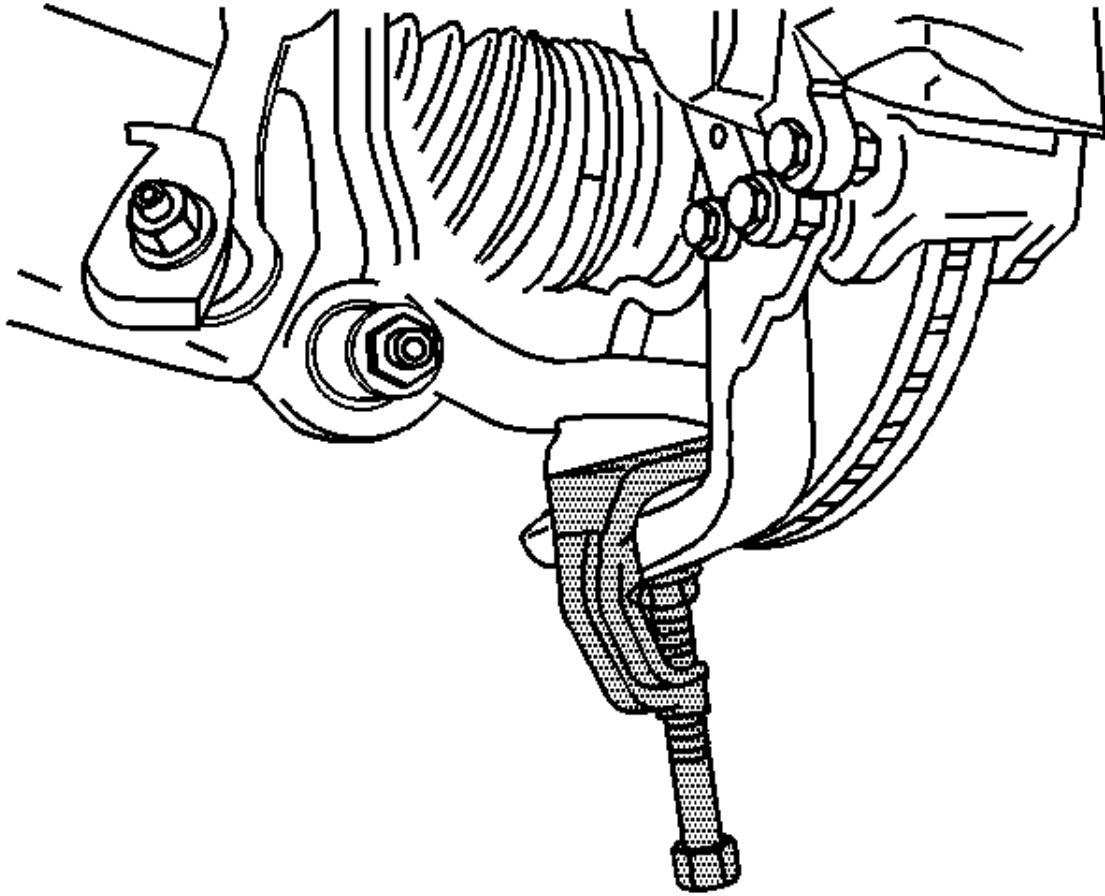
Removing Steering Knuckle From Lower Control Arm
